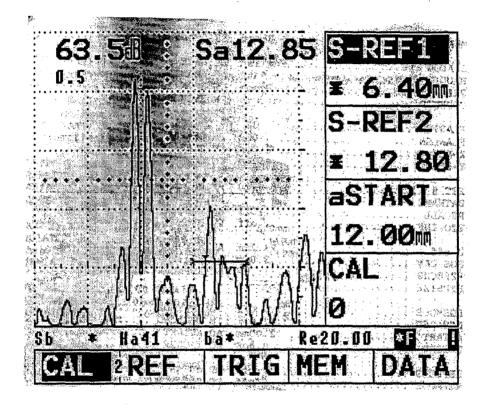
Ultrasonic echo pattern FM14AA1 Hot powder forged brake pad
